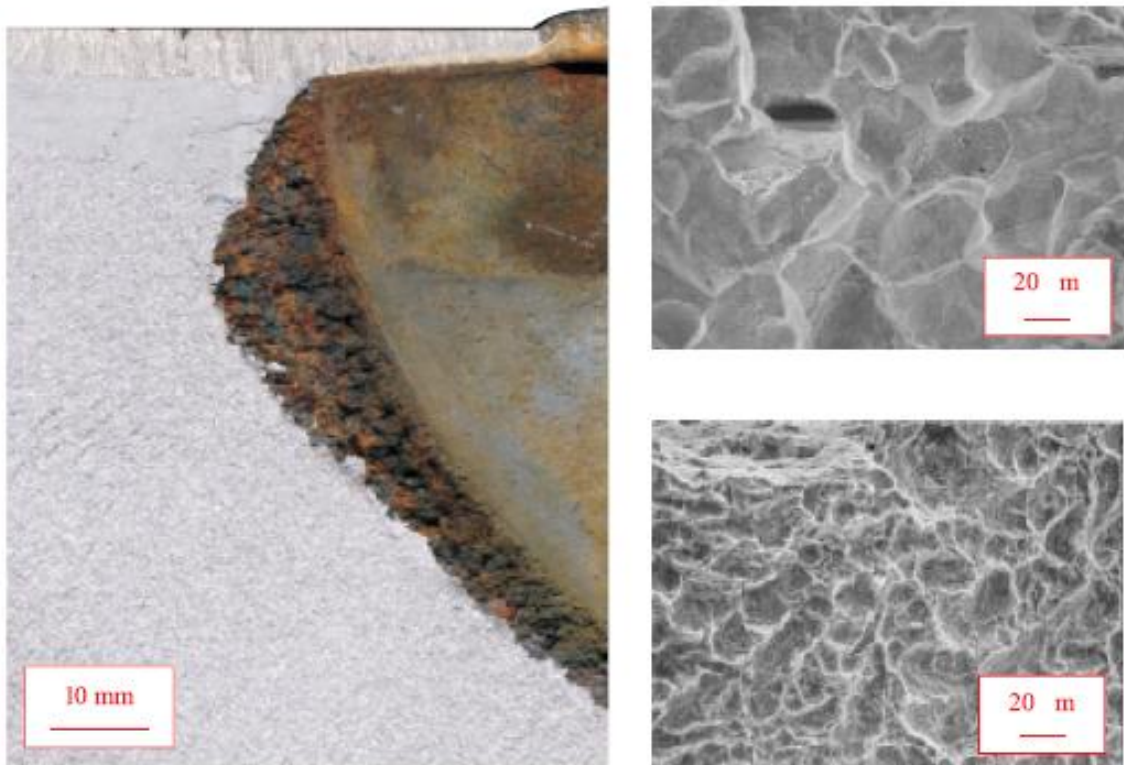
Detail of the fracture surface of defect B showing the area of maximum extension.
